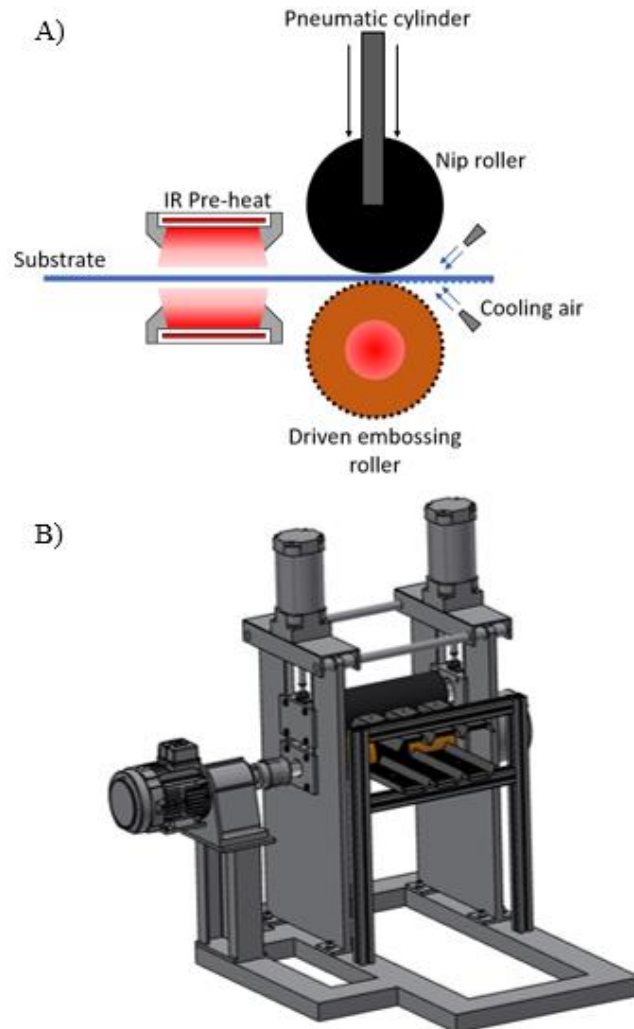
A) 2D diagram of the applied R2R hot embossing system format, b) CAD model of the developed R2R hot embossing system, with the main machine components visible.
